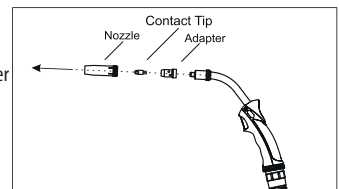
Separation of Nozzle and Contact Nozzle from the Torch
